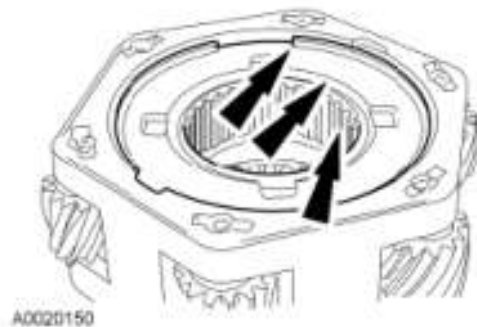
Locating Sun Gear, Thrust Plate And Snap Ring
